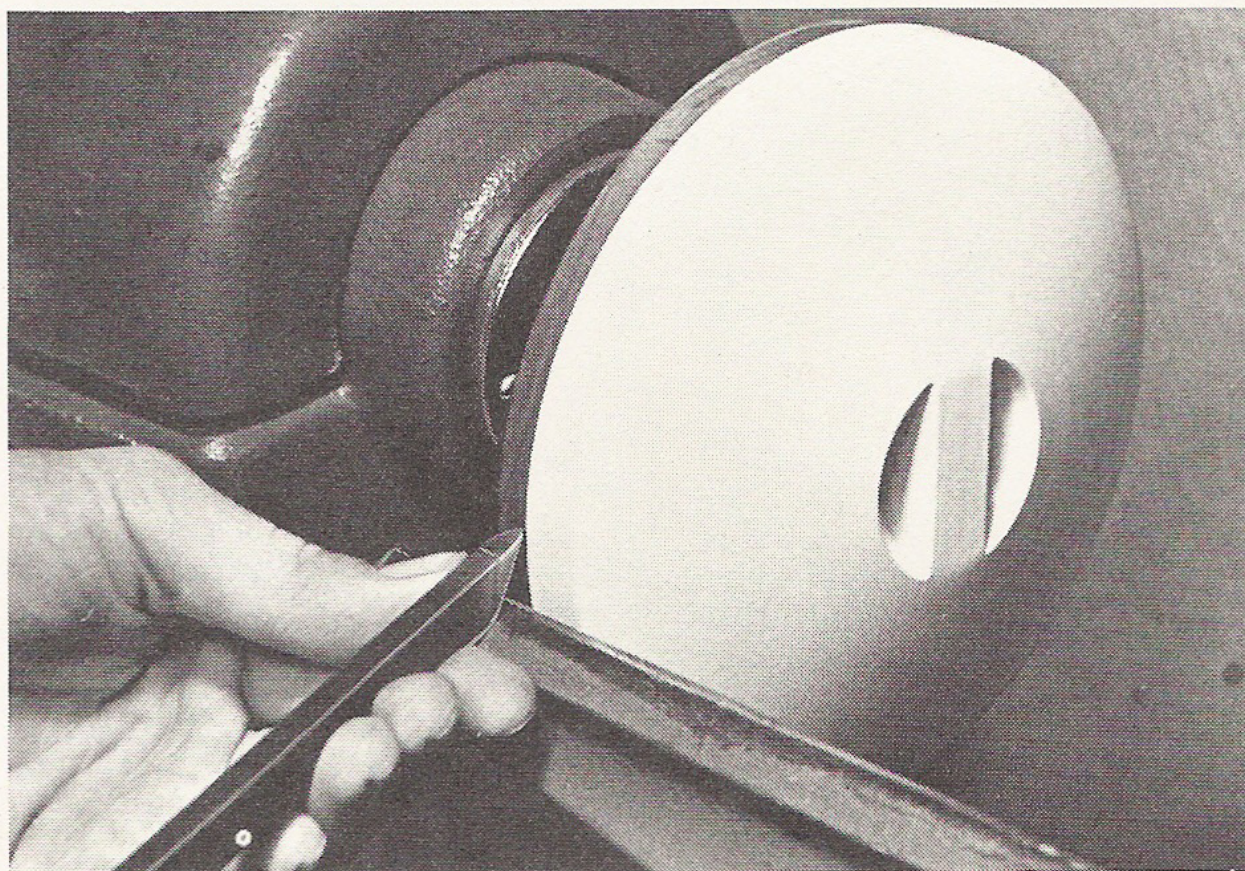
Removing excess material on a trimming fixture in a lathe.
